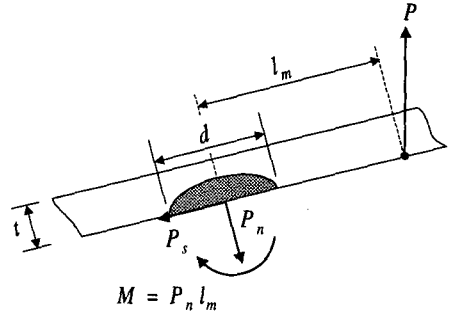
Axial (P_n), shear (P_s) forces and bending moment (M) sustained by a spot weld
